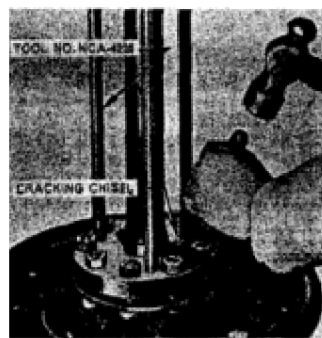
Cracking bearing collar with chisel after drilling hole as shown in Fig. 323.
